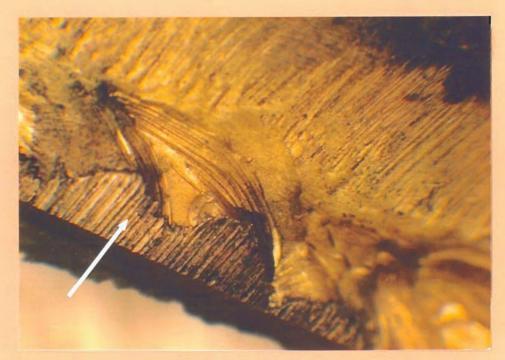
Grinding Marks Remaining on Bevel Surface of Circumferential Weld
